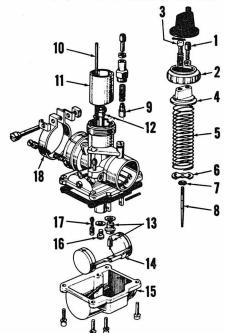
Exploded view of Mikuni sliding valve carburetor used on the Mach III.
